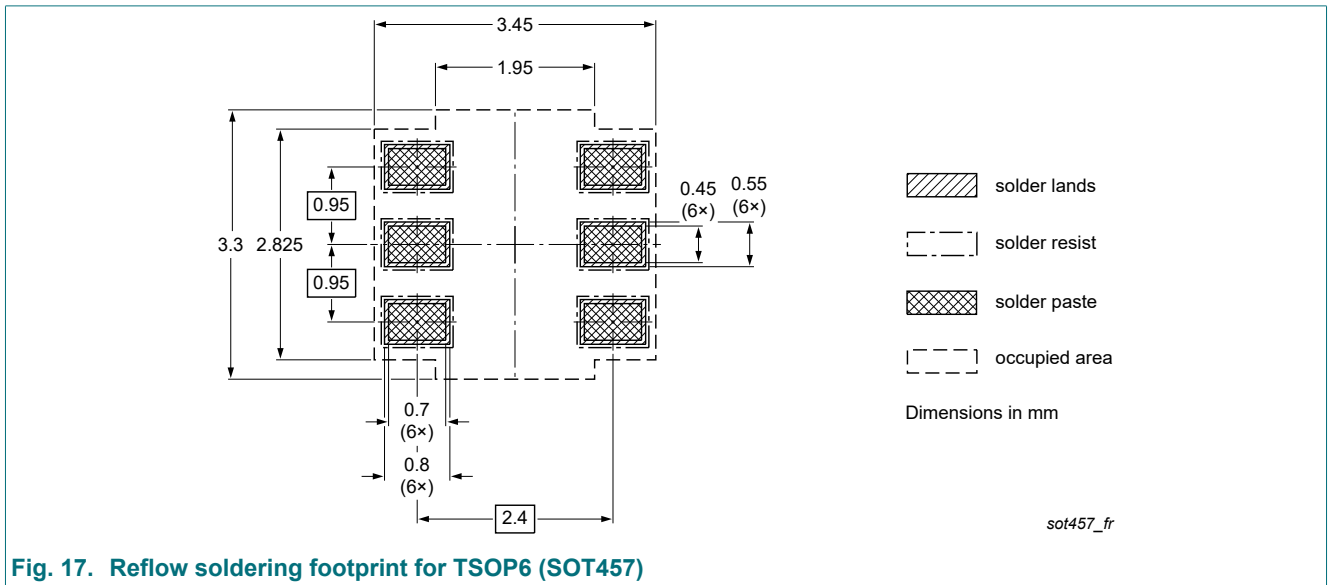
Reflow soldering footprint for TSOP6 (SOT457)
